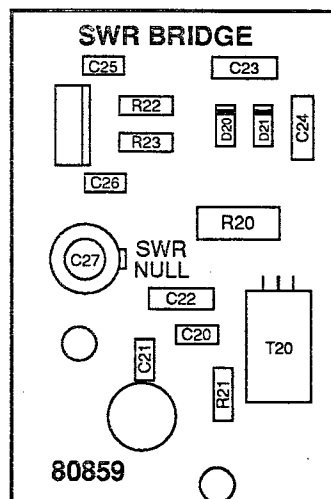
80859 SWR BOARD COMPONENT LAYOUT
